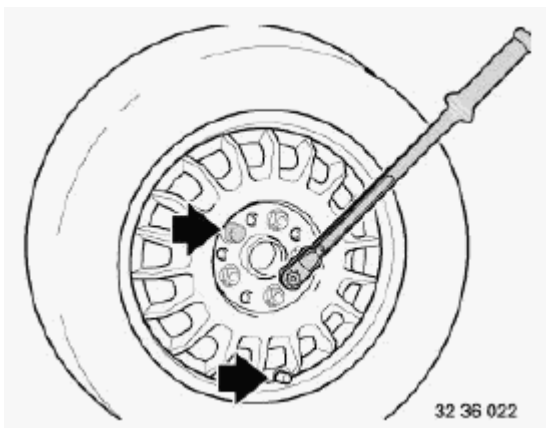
Tightening Down Wheel Bolts With Calibrated Torque Wrench
